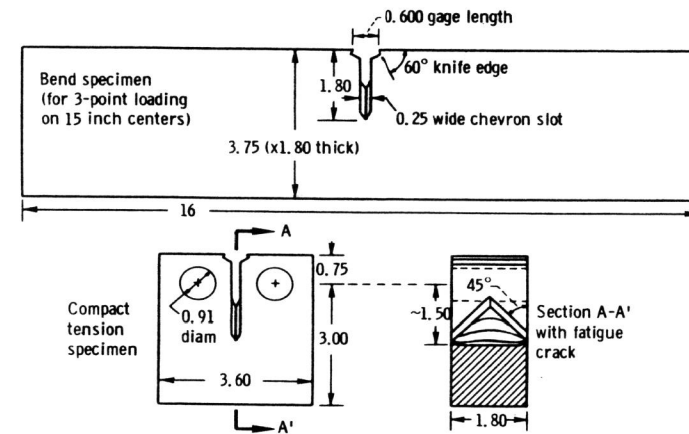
Plane strain fracture toughness specimens with dimensions in in.
